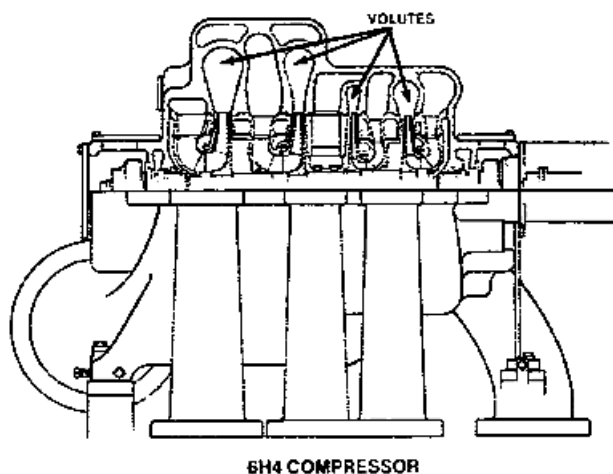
Cross-sectional view of an over-the-impeller volute-type diffuser. (*Dresser-Rand Company, Olean, N.Y.*)
